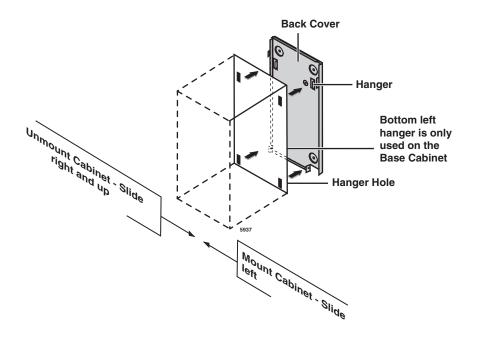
Mounting CTX100 Cabinet on Back Cover
